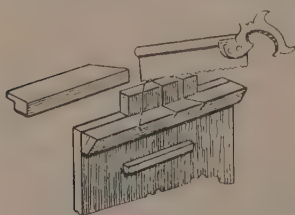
THE MITRE BLOCK AT LEFT END OF STOOL.
